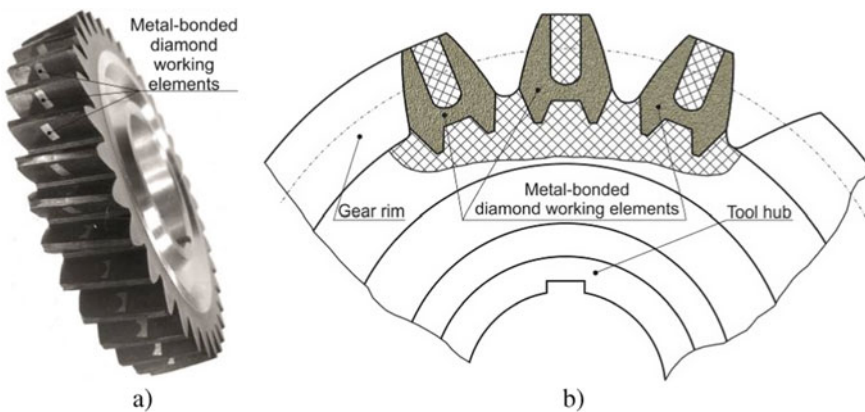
General view (a) and design (b) of a combined gear hone with working diamond elements of a special shape
